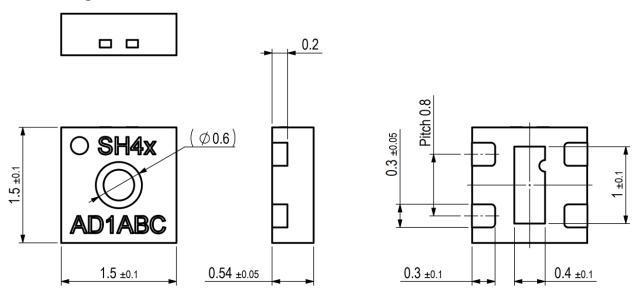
Dimensional drawing of SHT4x including package tolerances (units mm).
